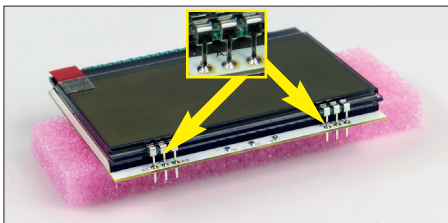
Display with backlight; shown here the side with the six soldered connections
